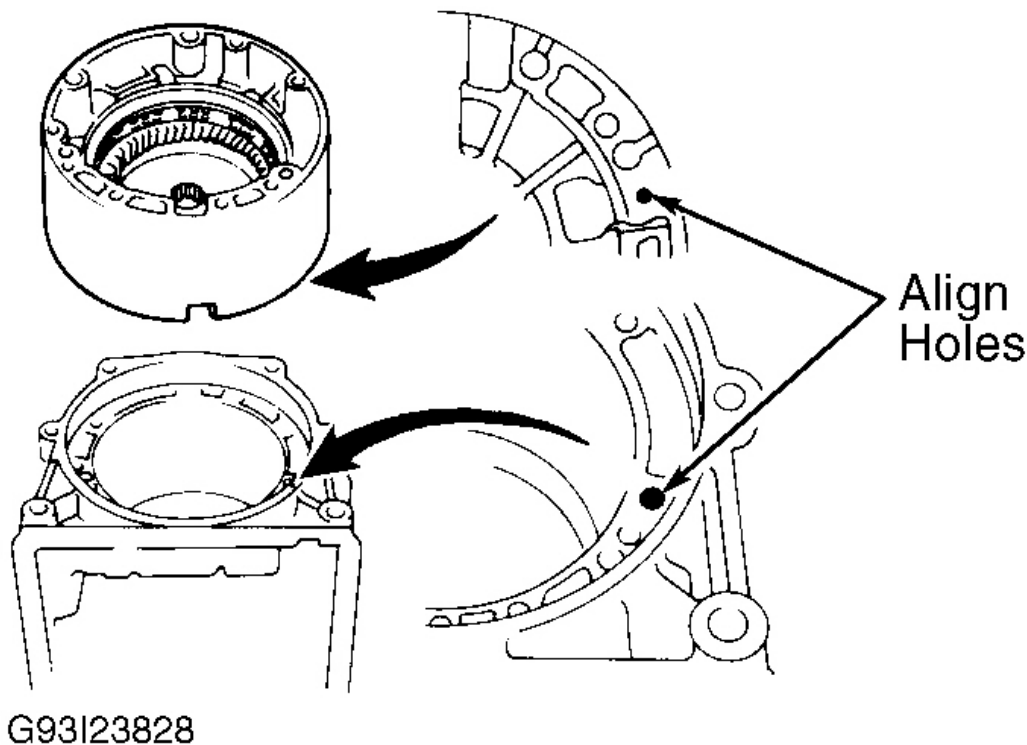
Aligning OD Case & Transmission Case Oil Holes
